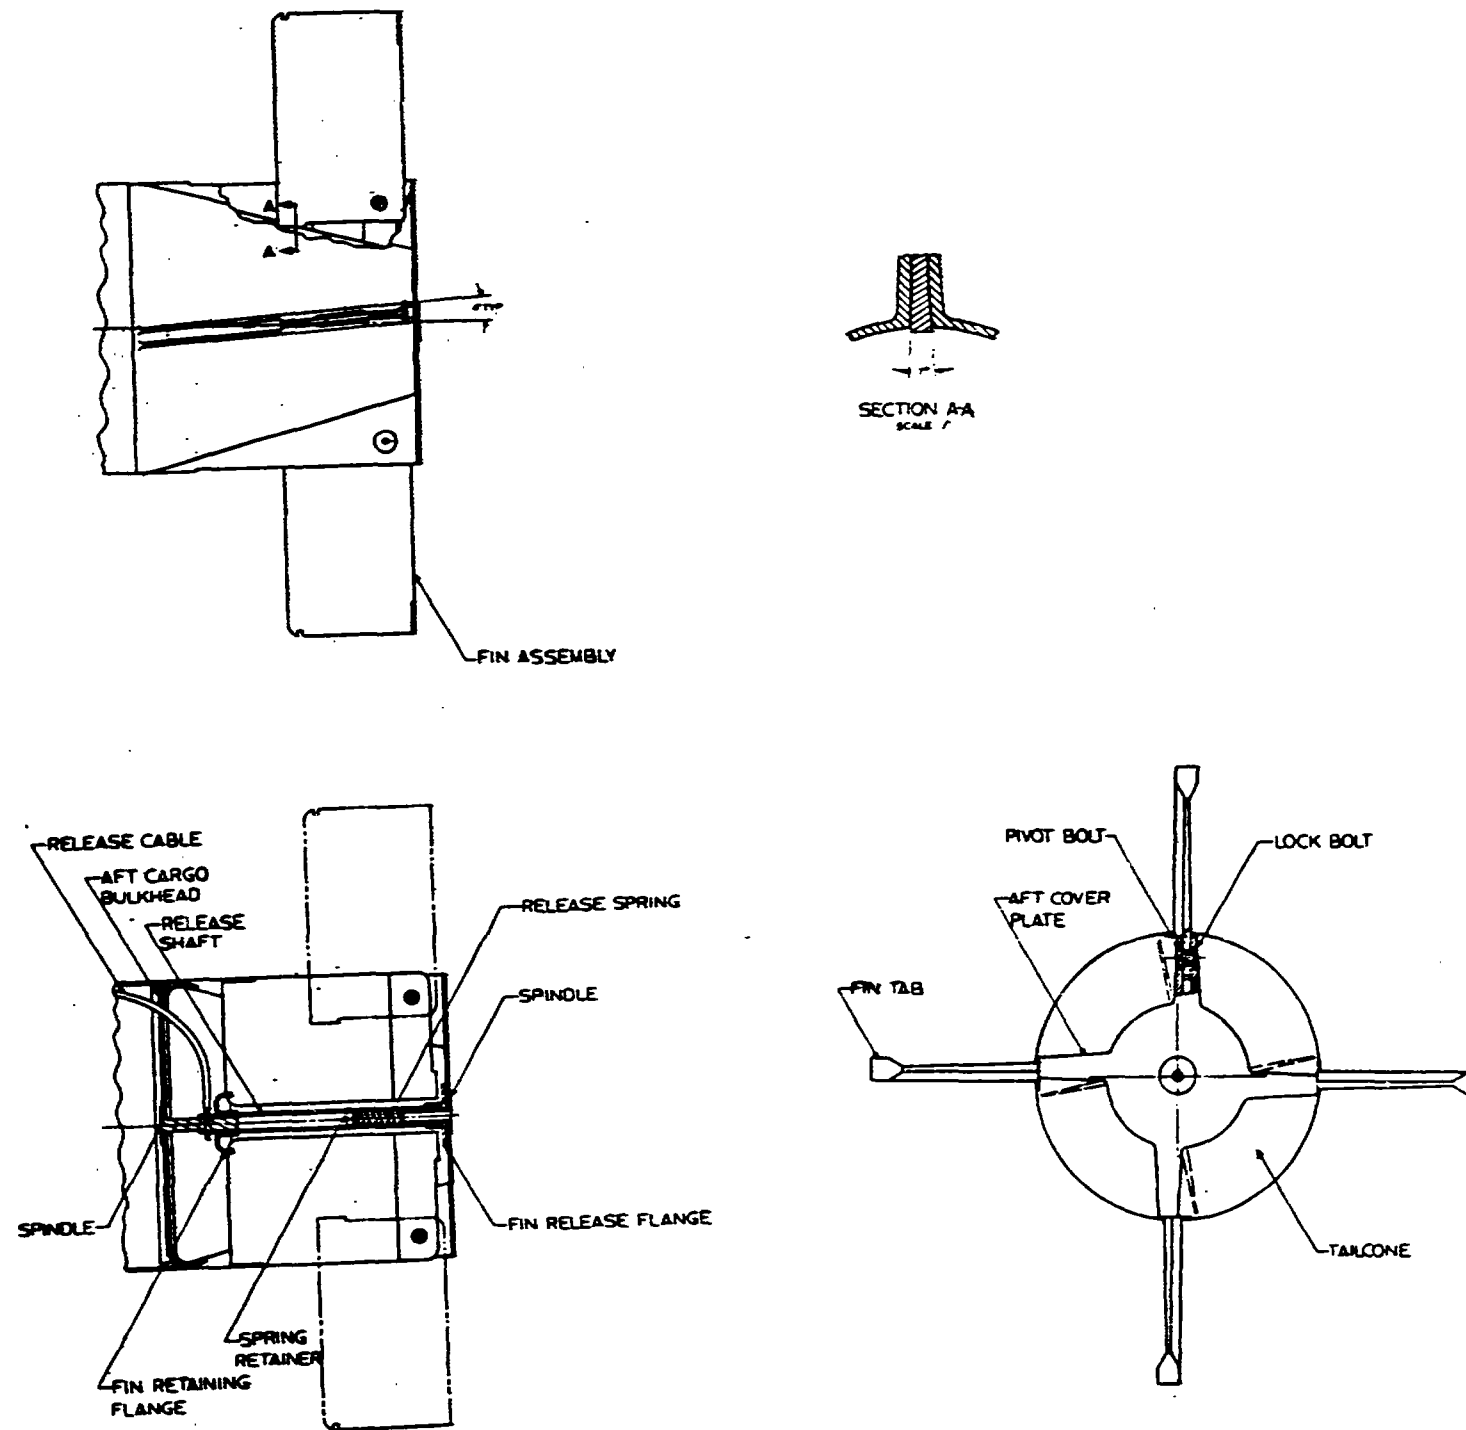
DISPENSER AFT SECTION ASSEMBLY
